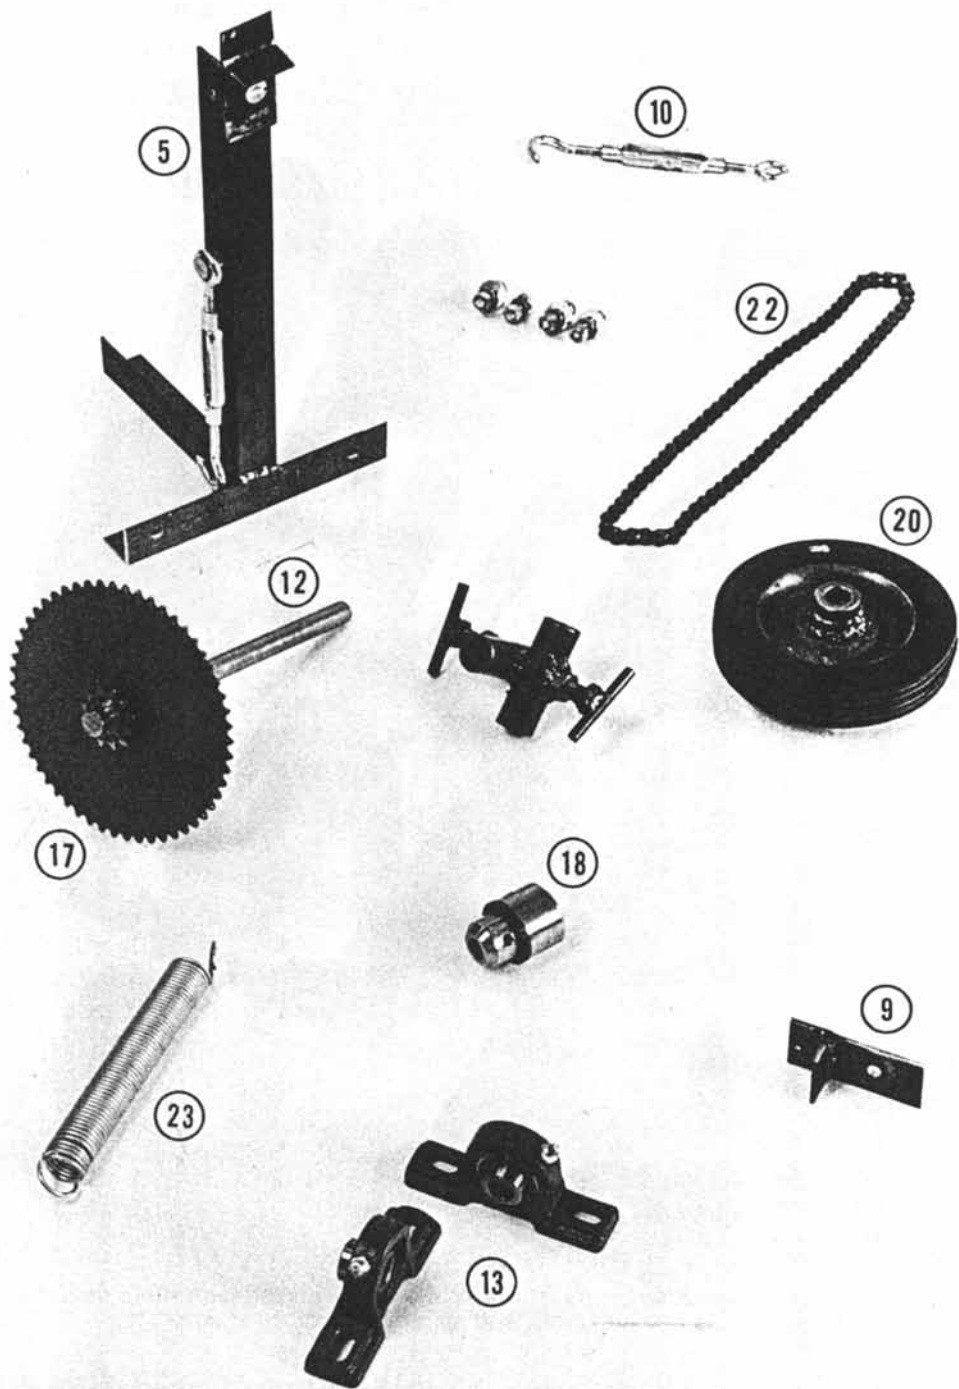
The rear-wheel adapter model consists of three components: floor frame and rear uprights, bicycle frame mounts, and spring-loaded power arm.
